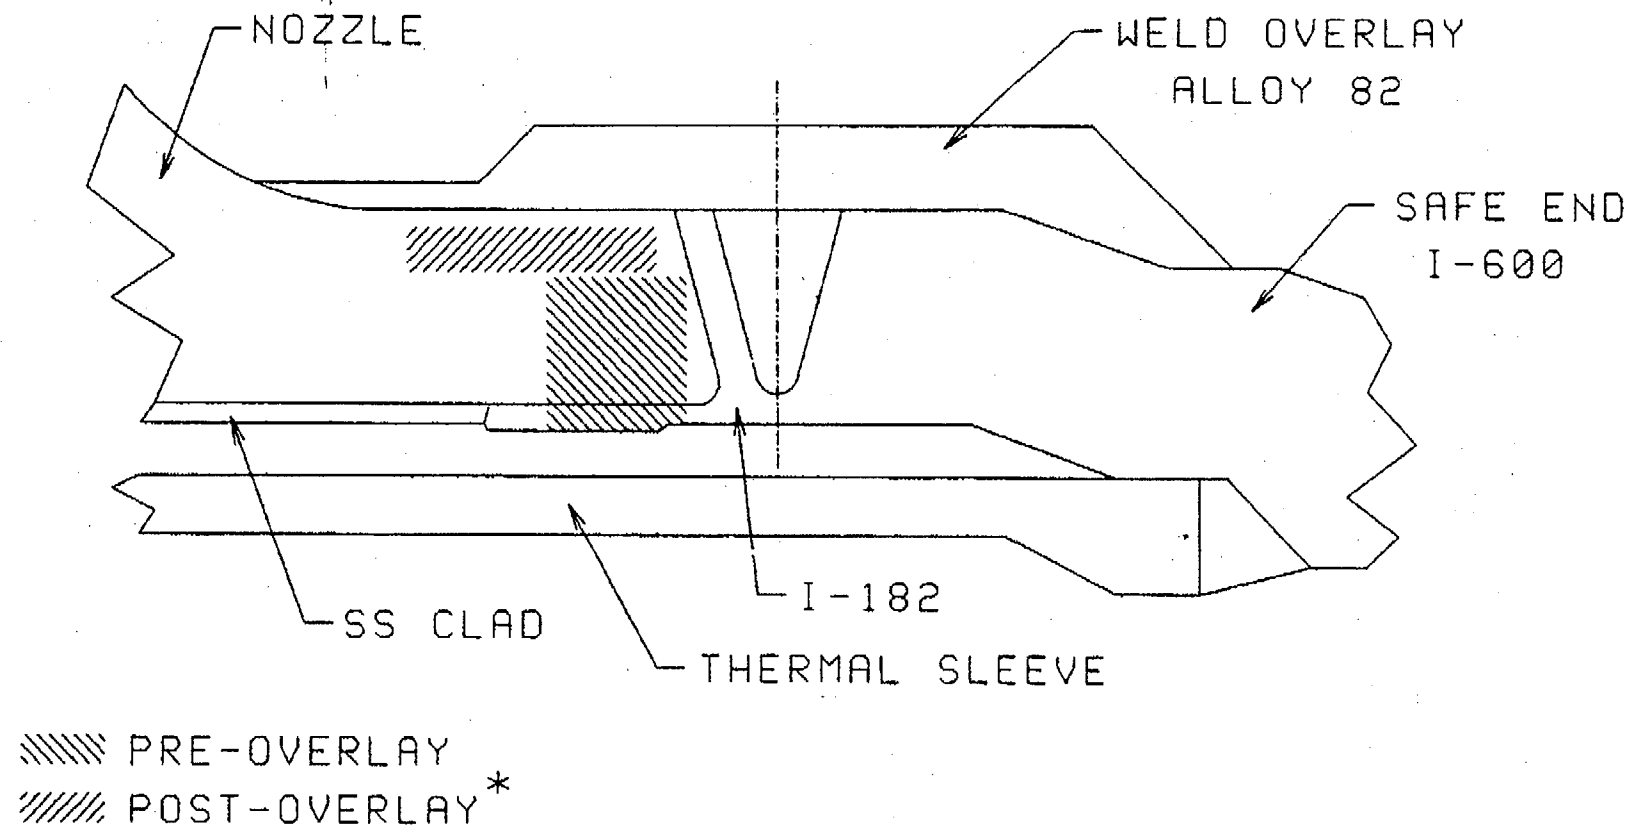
Typical Location of Ultrasonic Inspection Indications in Nozzle/Safe-end Weldment at Brunswick Unit 1 after Weld Repair [3-10]
